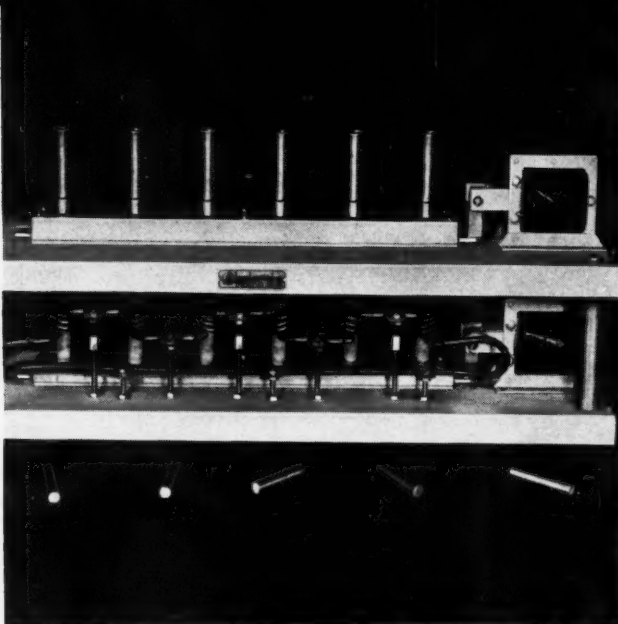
Multiple-coil Heating can be Further Mechanized by Handling Equipment Similar to the Solenoid-controlled Fixture Shown. Parts are Fed into Tubes at Top of Fixture and are Automatically Dropped into a Quenching Medium when Heating Cycle is Completed
